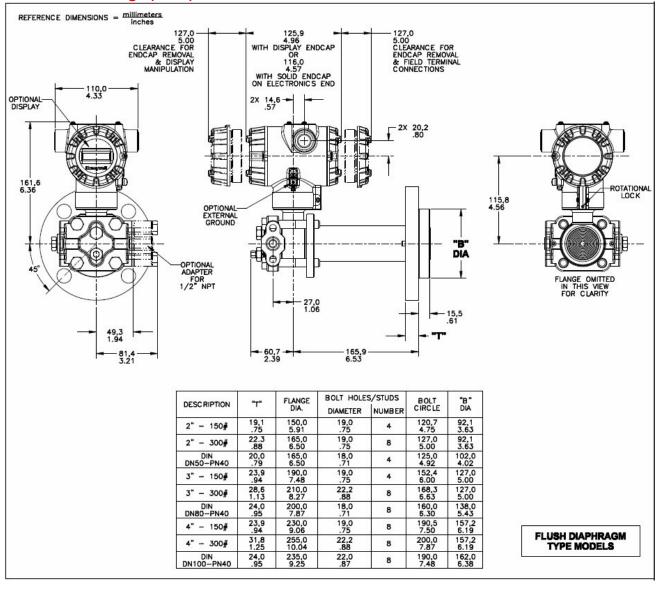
Typical mounting dimensions for flush diaphragm type models STF728 and STF732.
